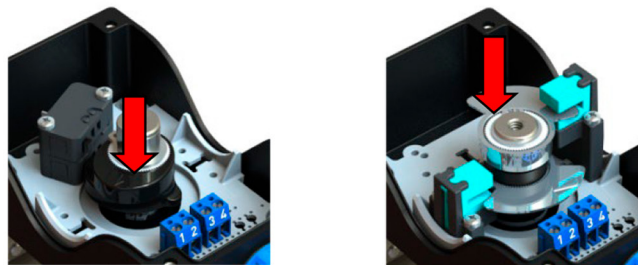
Adjusting cams in rectangular switches (left) and slot-type sensors (right)
